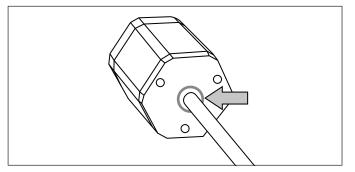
Correct position of the O-ring in the groove of the sensor electronics housing
